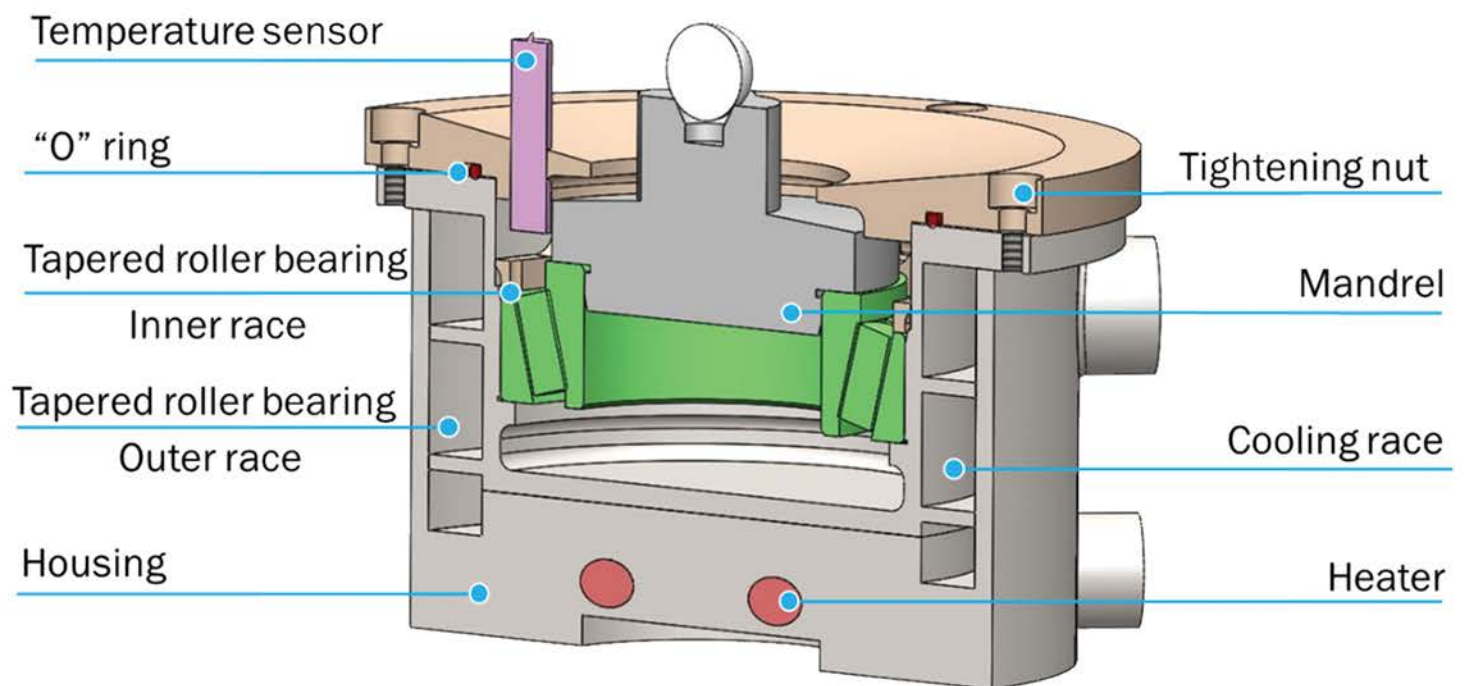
Cut section of bearing pot in Ducom Shear Stability Tester (KRL)
